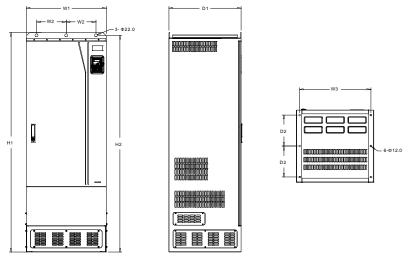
Floor installation diagram of inverters of 400 V, 355 to 400 kW
